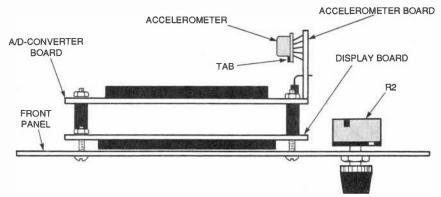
This is a top-side view of the "g" Machine. Make sure U2 is placed so that its tab points towards the front panel, as shown. The boards are mounted with spacers and machine screws and nuts.
